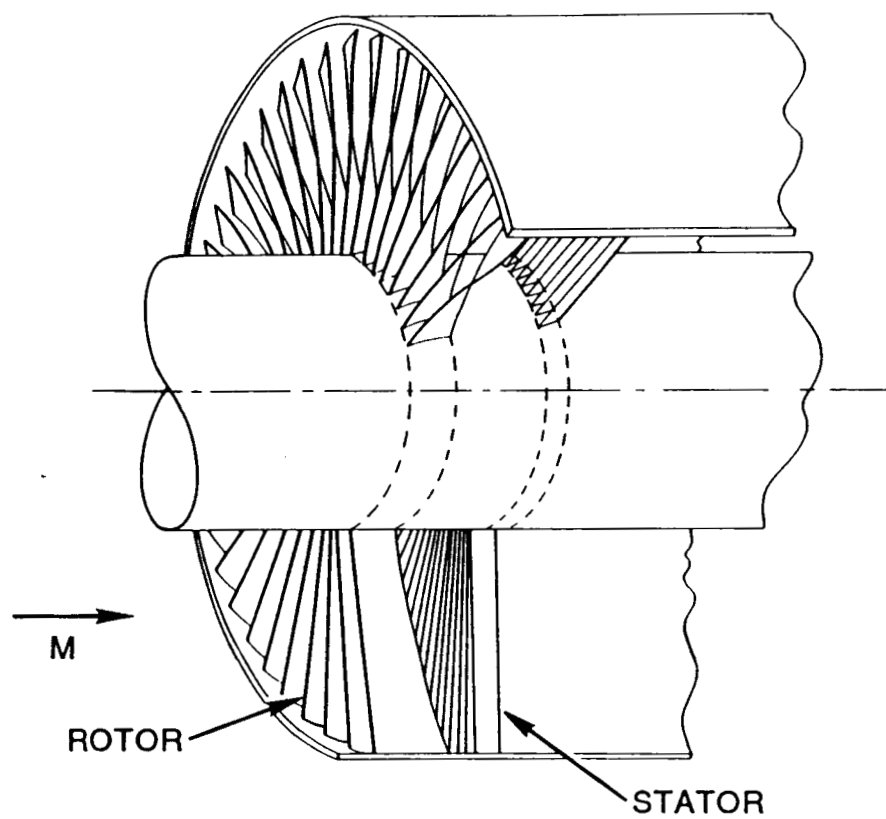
Three-dimensional rotor and stator geometry (ref. 3).
